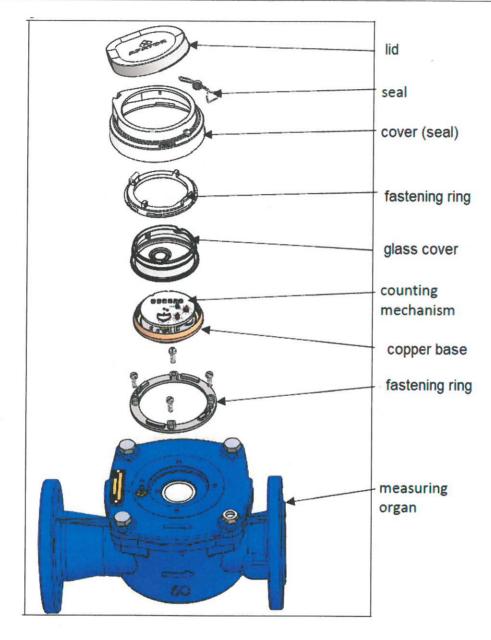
Illustrative exploded view of the water meters type JS...-08 with IP68
